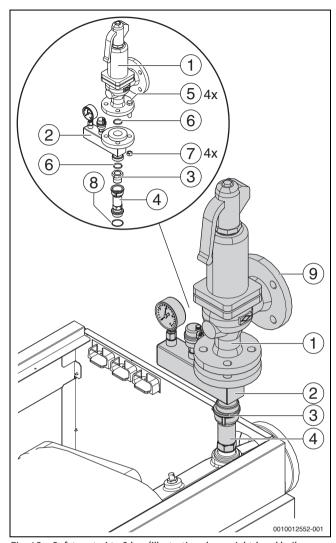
Safety set, 4 to 6 bar (illustration shows right-hand boiler setup)
